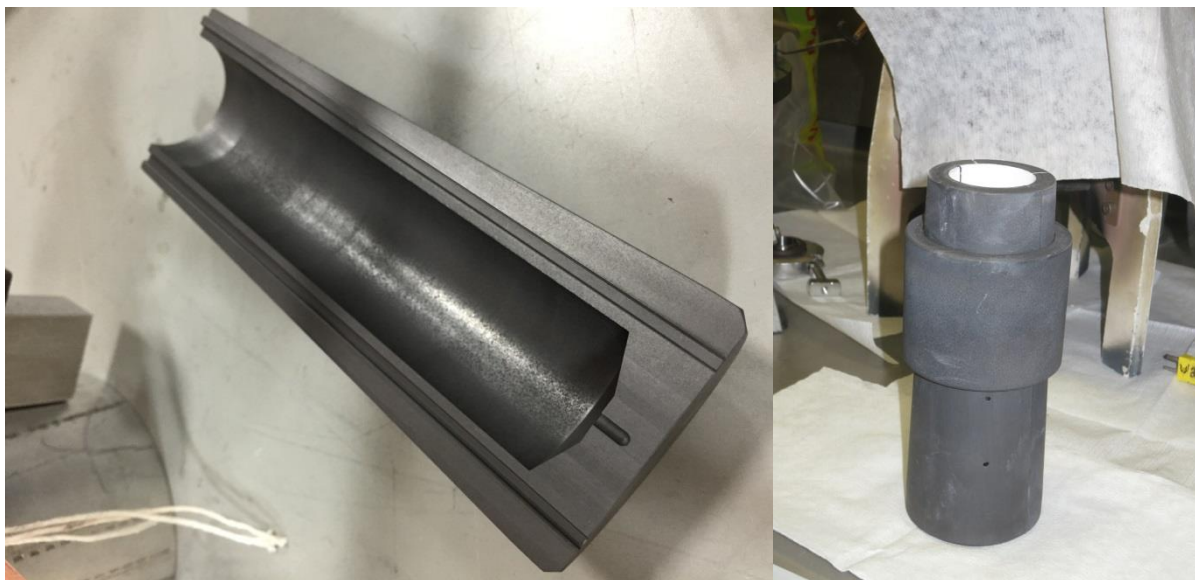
Half of the graphite billet mold with ICP tip at bottom (left). Mold stack assembled (right).
